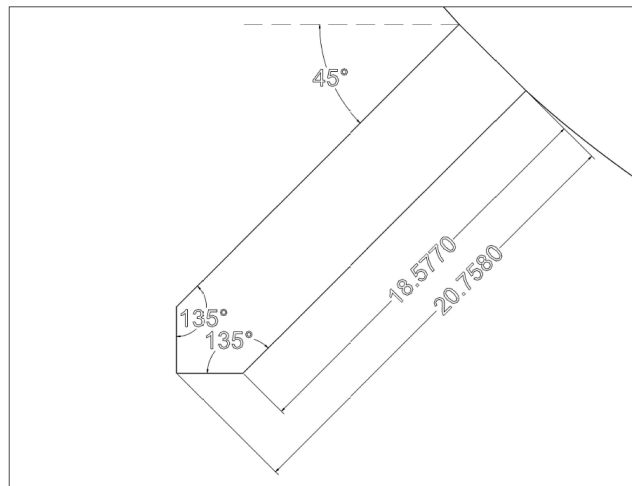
The alternative bilge keel tip shape, shown with dimension in millimeters
